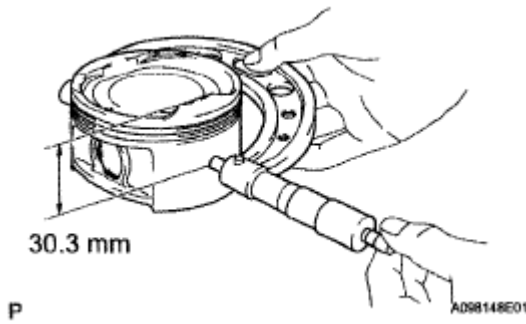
Measuring Piston Diameter Right Angles To Piston Pin Hole
